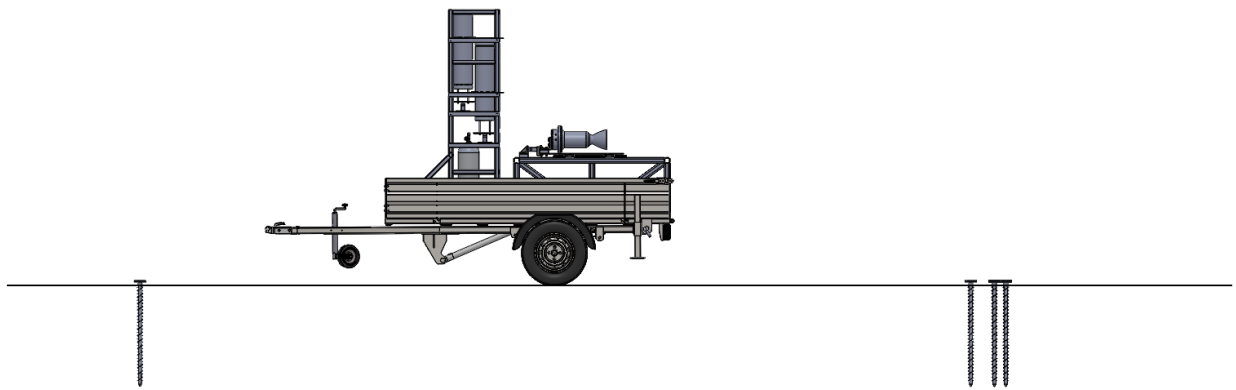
Test stand structure with ground anchor positioning SIDE VIEW
